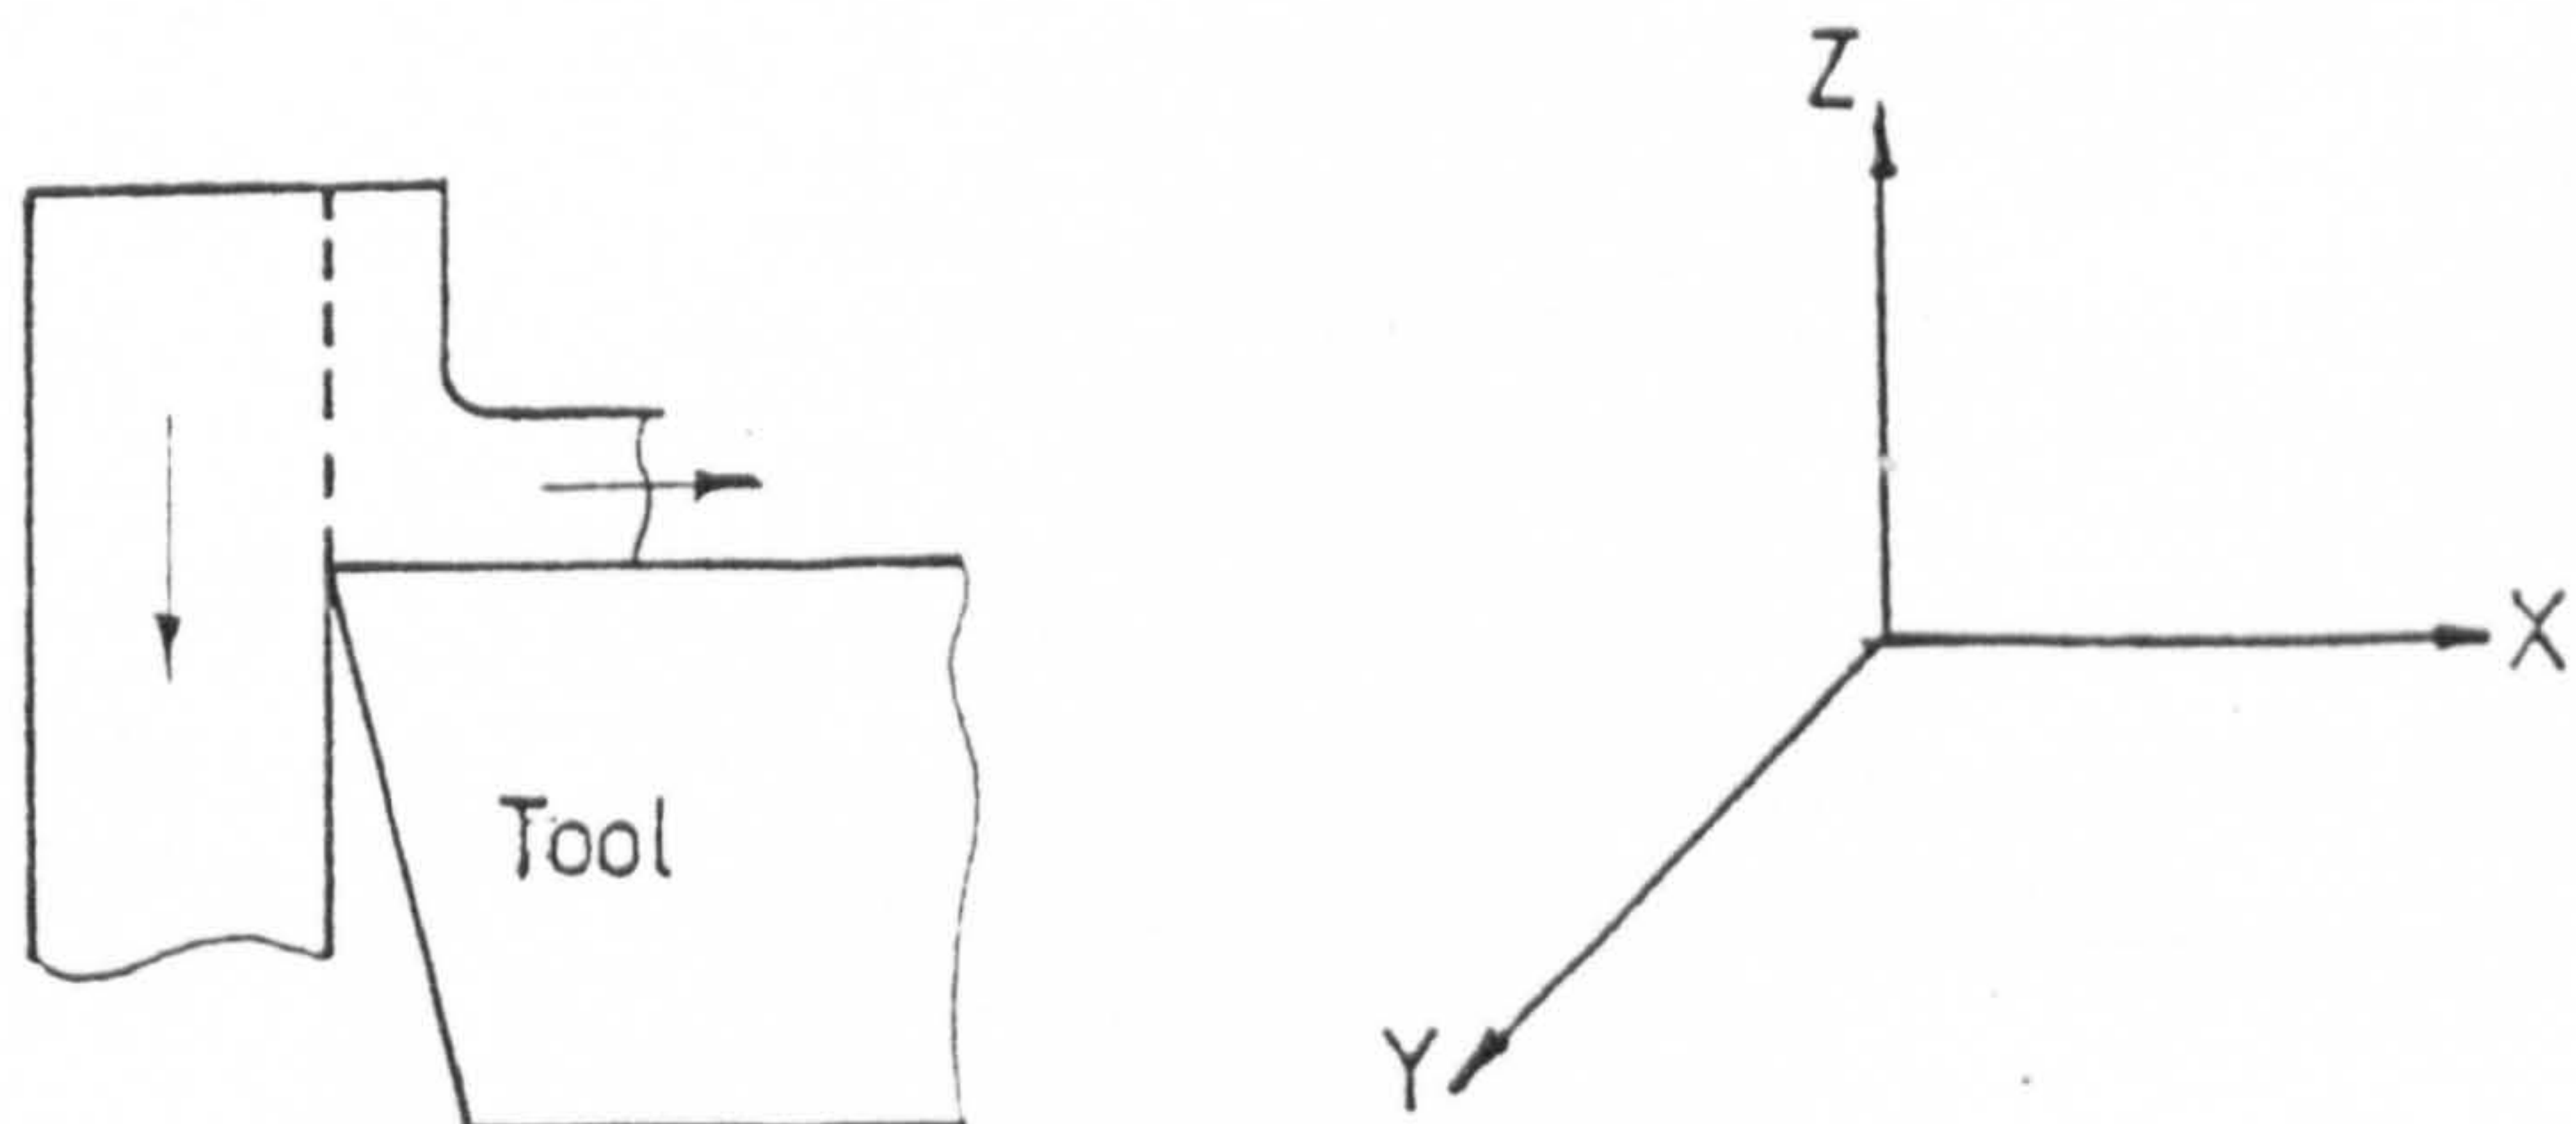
MATERIAL BEHAVIOUR AT THE CENTRE OF THE WORKPIECE
